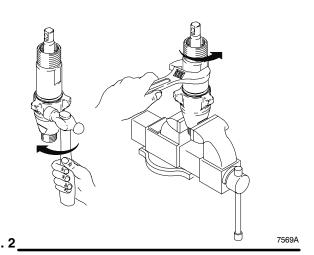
Disassemble intake valve. Clean and inspect. O-ring (227) may require a pick for removal.
